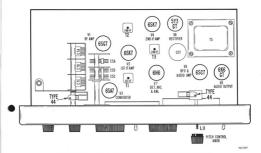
Top View of Chassis Showing Tube Locations and Alignment Adjustments
